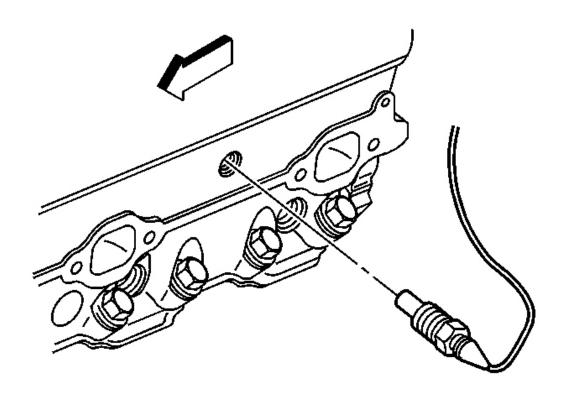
Engine Coolant Temperature Gage Sensor Courtesy of GENERAL MOTORS CORP.
